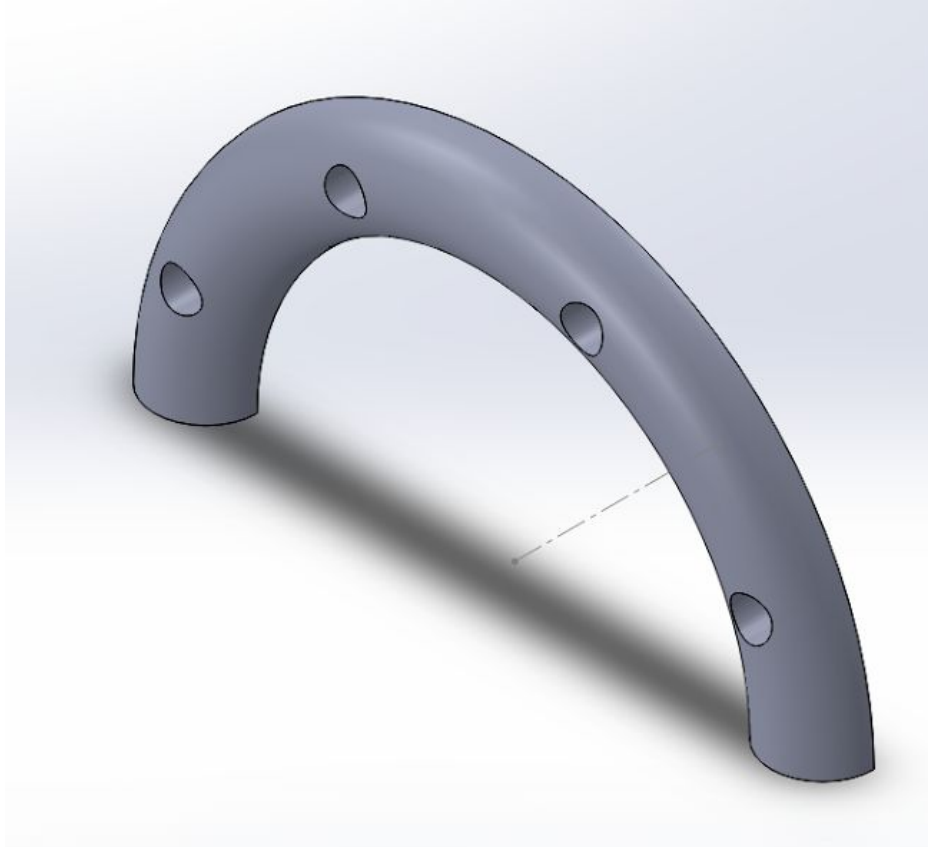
Two of this piece formed a ring and two of those rings placed back-to-back formed the clamp.
